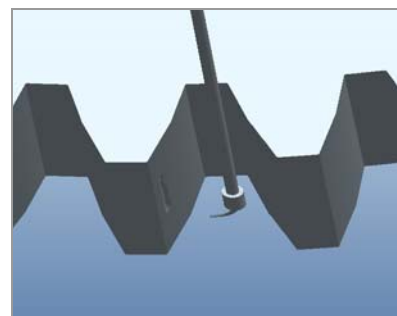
Welding gun moves along Y axis transverse lead rail straightly.
